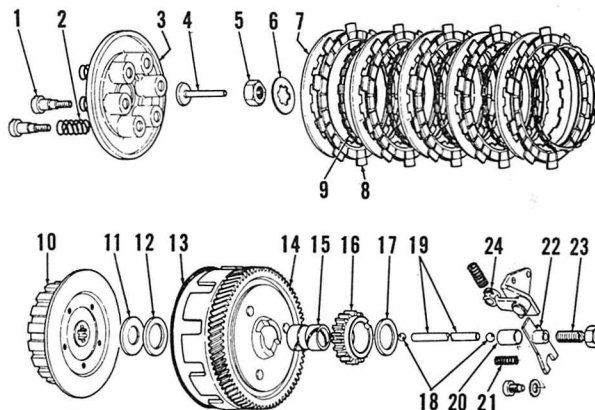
Exploded view of the clutch assembly. Parts (20 thru 24) are located in left cover.
